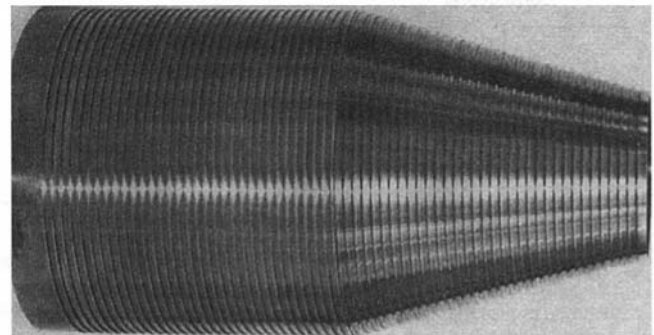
(b) Inner shell of rich stage combustor liner prior to attachment of longitudinal bosses and outer skin
